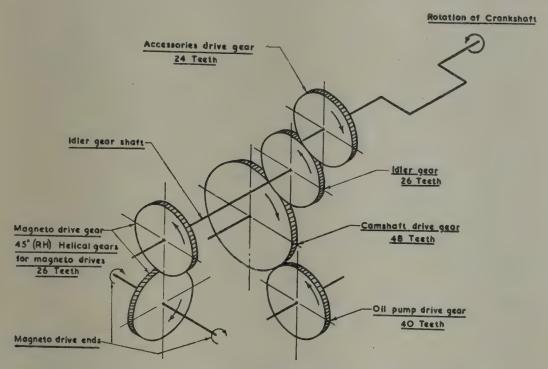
SCHEMATIC GEAR TRAIN DIAGRAM OF ACCESSORIES DRIVE
